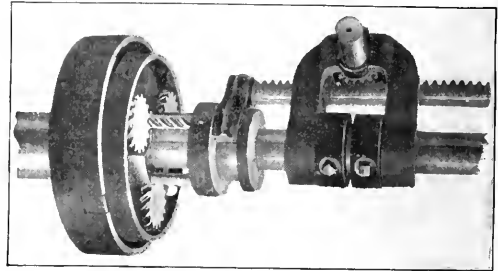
RACK-AND-PINION CLUTCH SHIFTER
